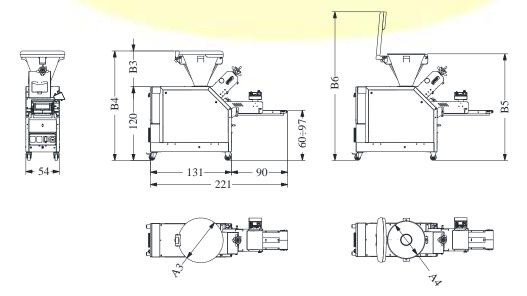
Overall dimensions of the machine with hopper equipped with interlocked cover (*)
